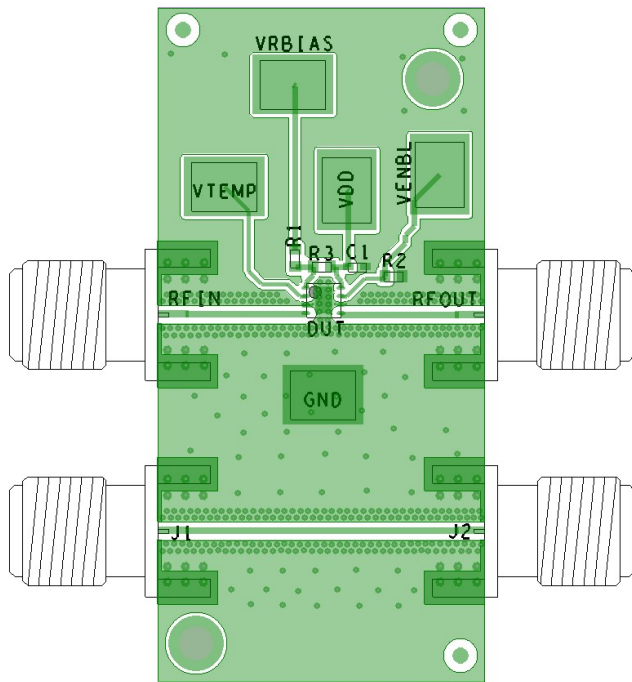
ADL8124-EVALZ Assembly Drawing (J1 and J2 Are Not Installed)
